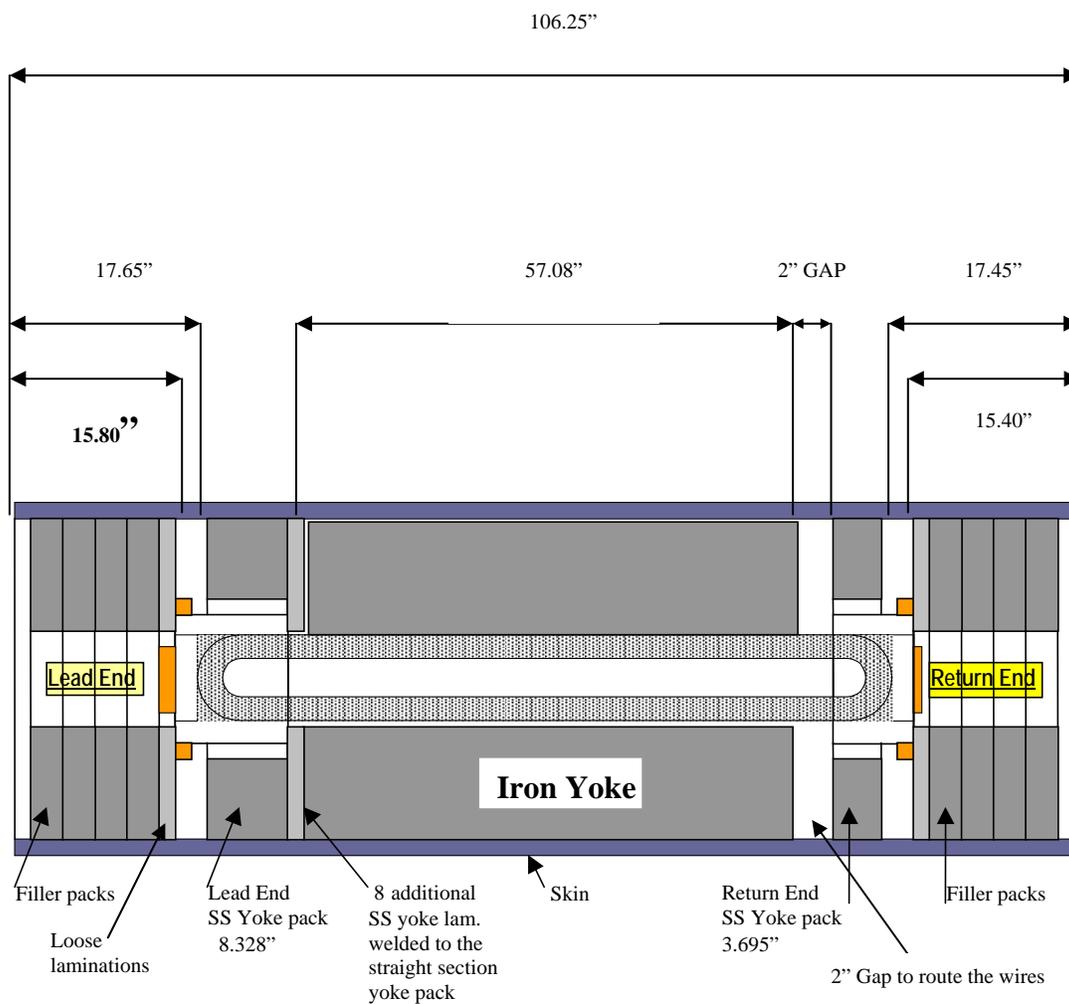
HGQ-07 Yoke Assembly Configuration
